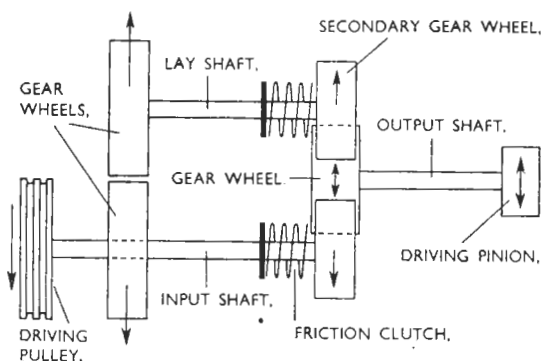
Diagrammatic arrangement of Crown reversing gearbox.
